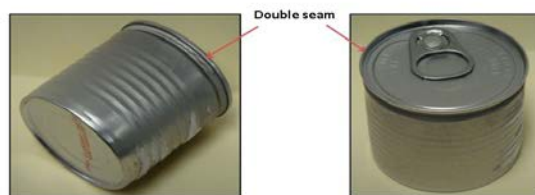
Cylindrical Shape 2-Piece Aluminum Containers Depicting Double Seams
